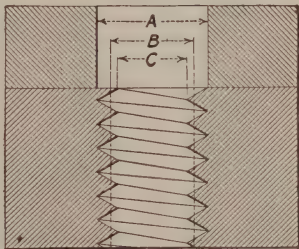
A is a body size; C is minor diameter; B is tap-drill size that will leave enough stock for about three-quarters of a full thread as shown.
